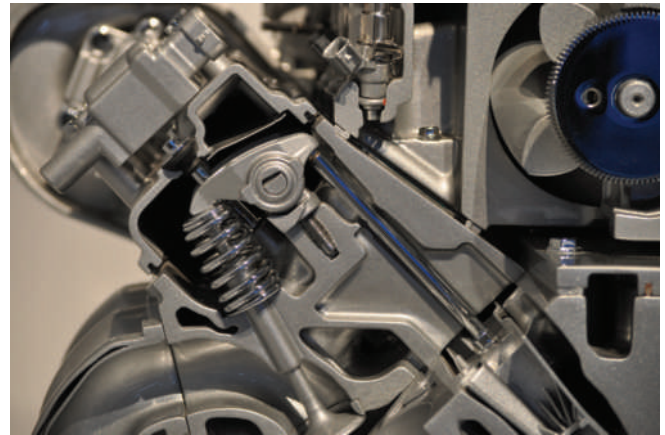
The valve train for one cylinder of an overhead valve engine.
